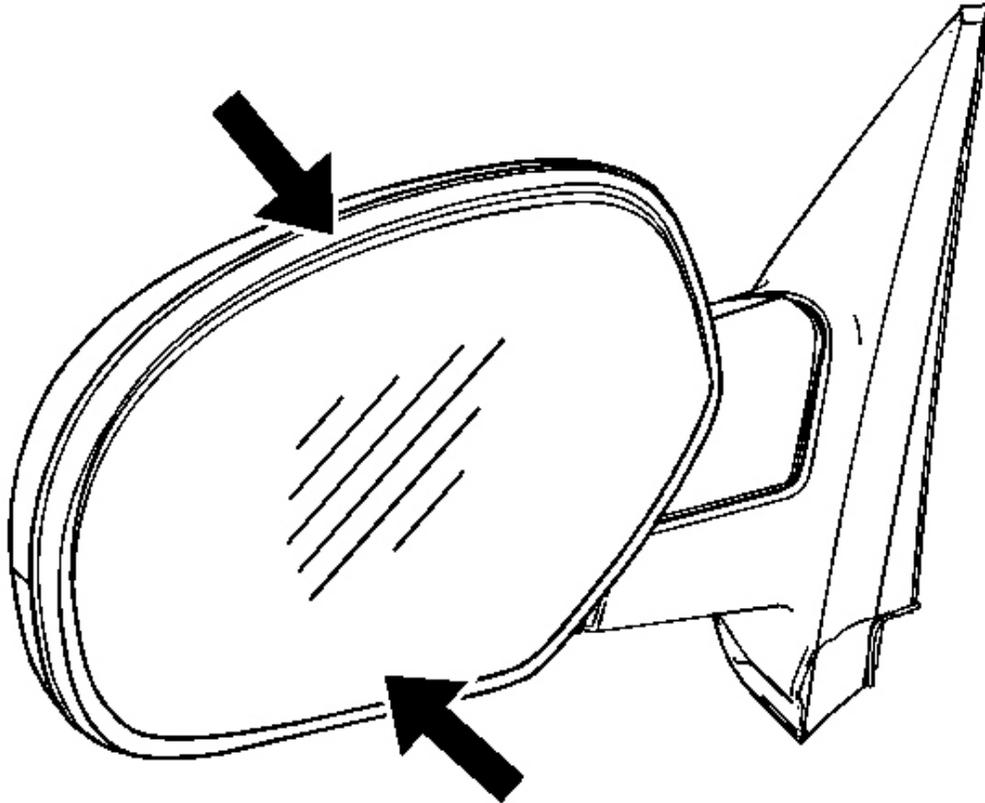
View Of Outside Rearview Mirror Motor
